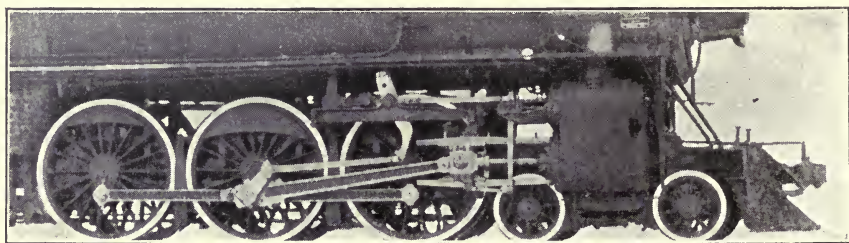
Cylinder and drive wheels of a locomotive with Waelschert gear.
